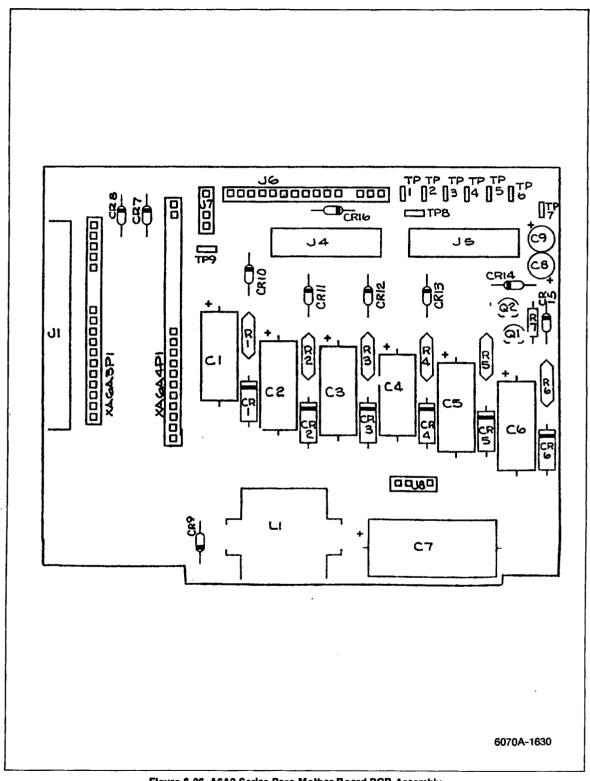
A6A2 Series Pass Mother Board PCB Assembly
